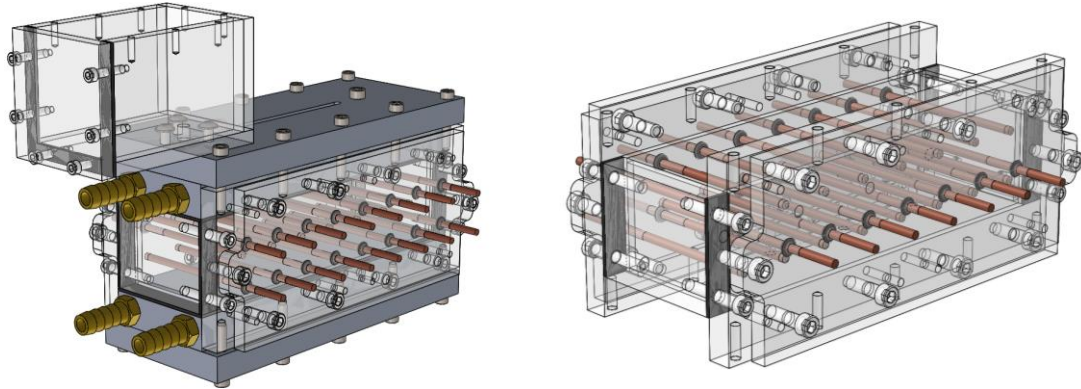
PCM Chamber assembly (Left) PCM chamber side panels with embedded electrodes from sides (Right)
